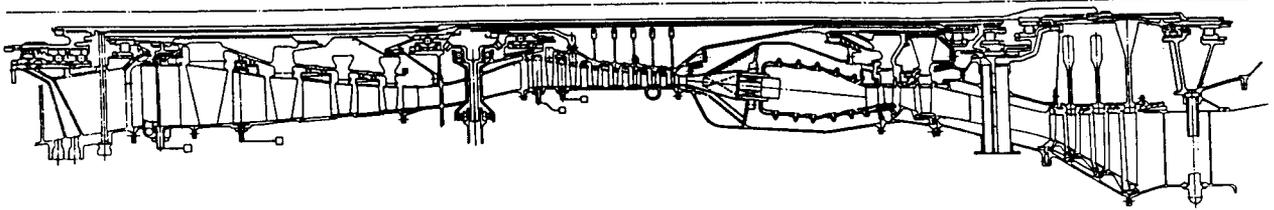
Mechanical Cross Section of the Three-Spool All-Axial Engine (STS647) - The major feature of this engine is a hot strut bearing support system for the high rotor. (J27638-910)
